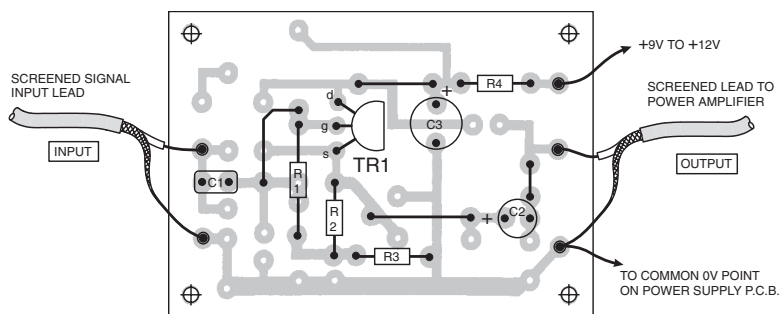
Printed circuit board component layout, wiring and full-size copper foil master for the F.E.T. High Input Impedance Preamplifier.
